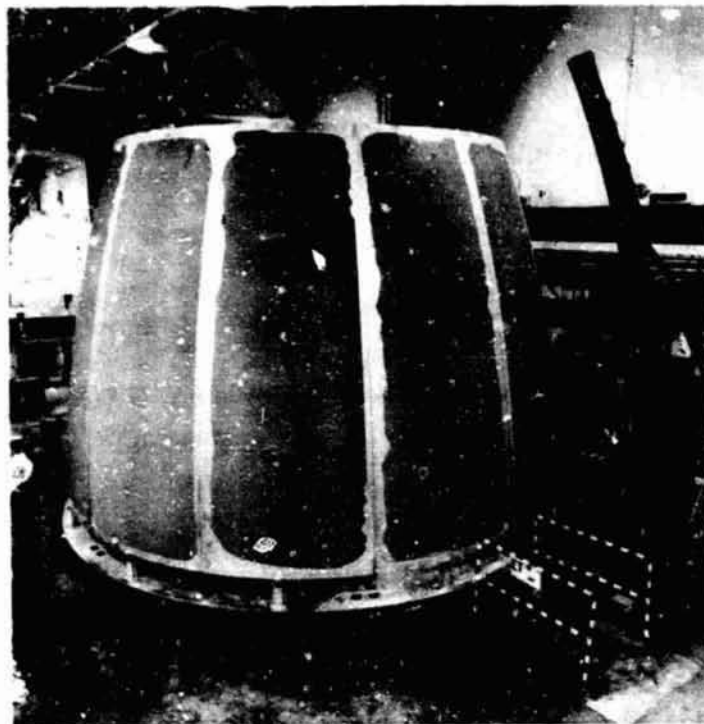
Ogive Welded by VPPA Process at Michoud on Fixture 5014.
